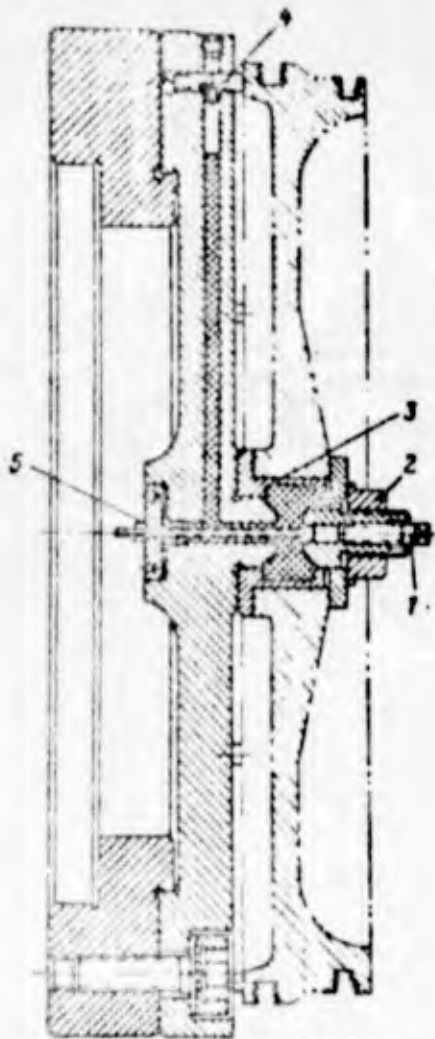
Positioning and fastening of wheel of turbine of turbopump unit in lathe attachment with hydrolayer.
